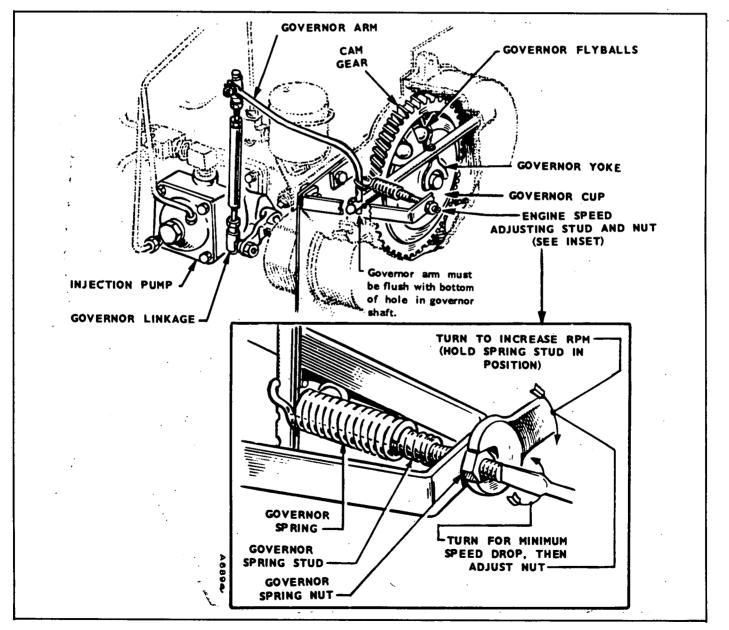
GOVERNOR ASSEMBLY AND ADJUSTMENTS
